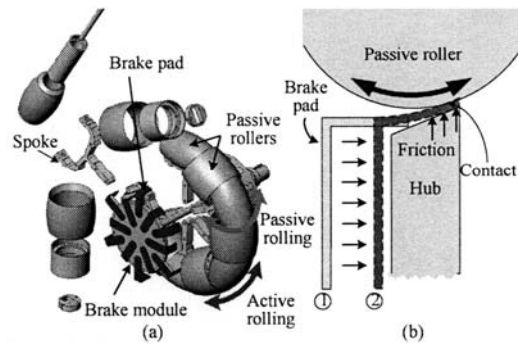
(a) Disassembled CAW with brake module, and (b) passive roller brake mechanism.
